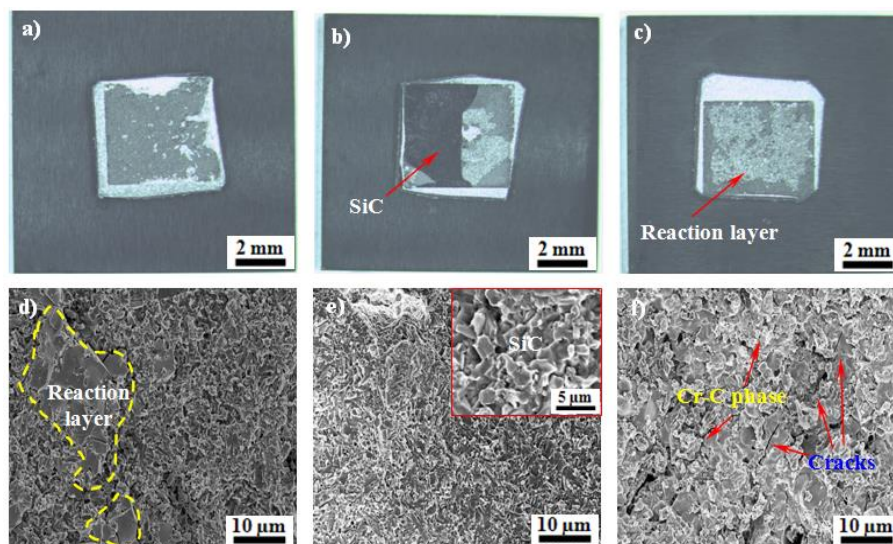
Fracture surface of SiC/SiC brazed joint after shear test at different brazing temperature for 3600 s: a) and d) 1433 K; b) and e) 1453 K; c) and f) 1473 K.
